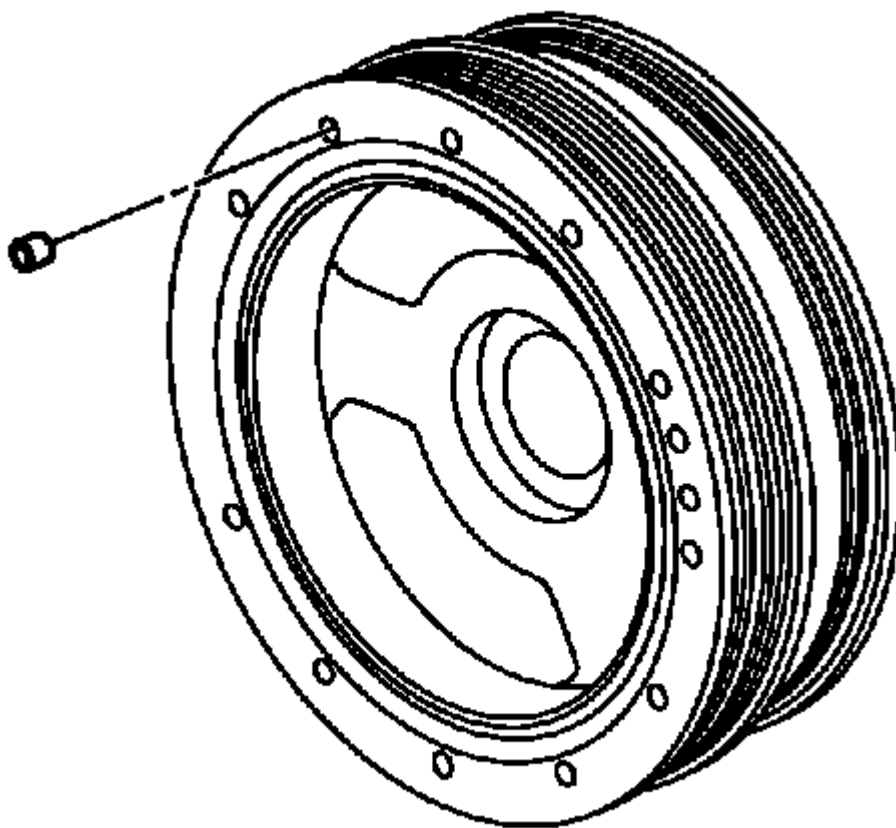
View Of Balancer Weights In Crankshaft Balancer
